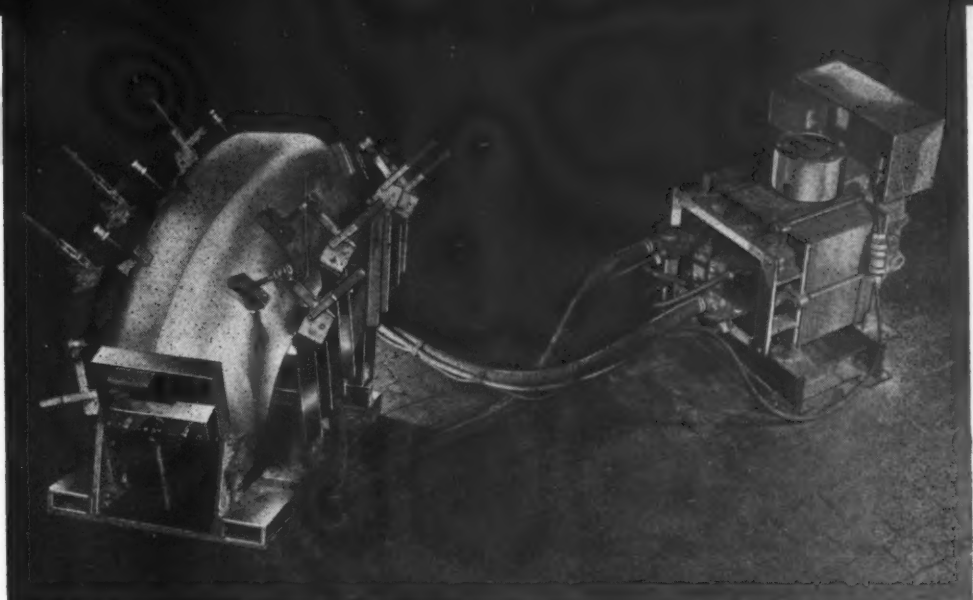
Automatic Resistance Welding Machine which is Used to Join Fourteen-gage Reinforcements to Under Side of Eighteen-gage Floor Pans
